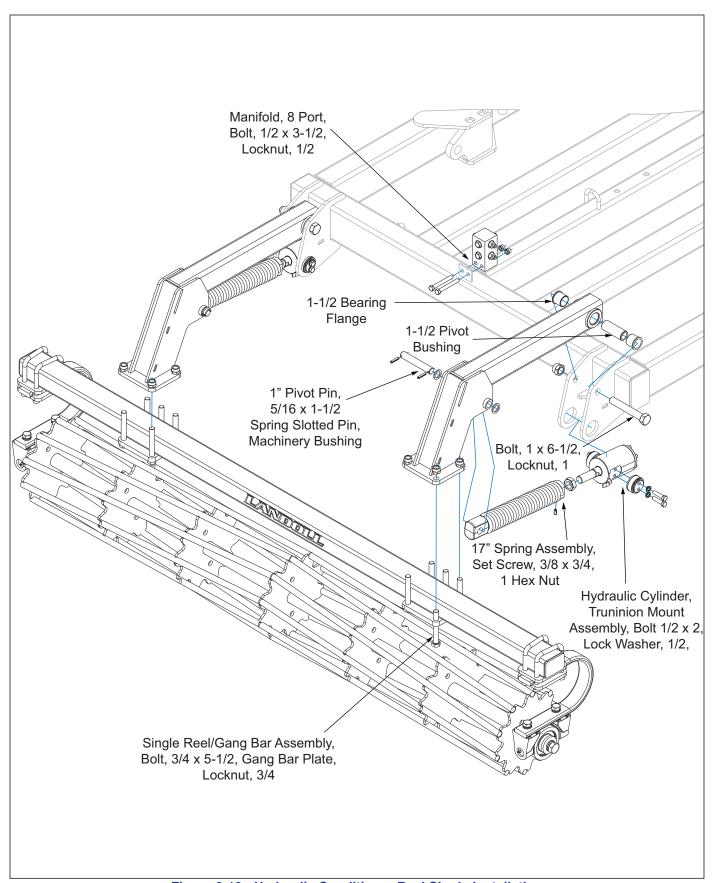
Hydraulic Conditioner Reel Single Installation
